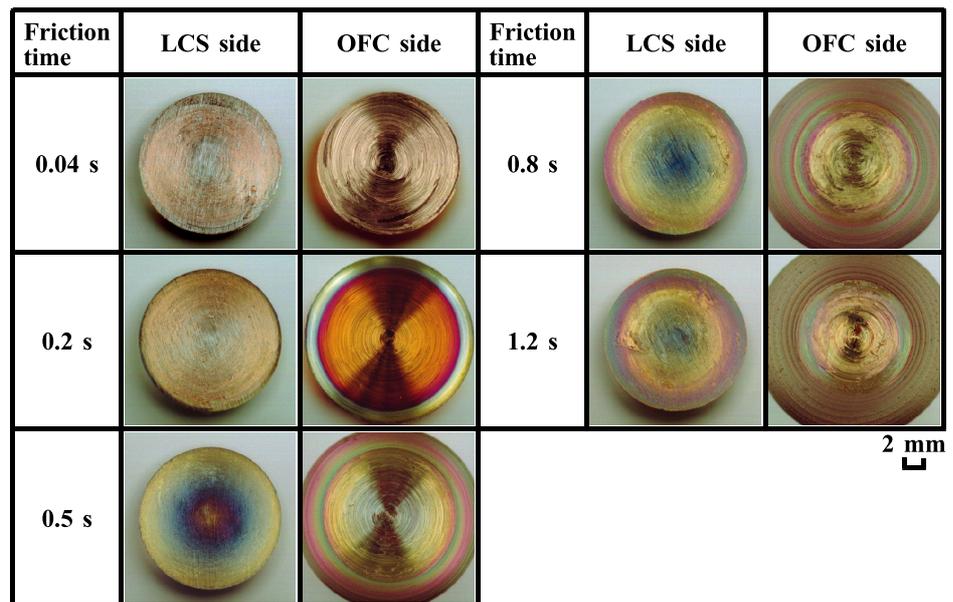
Appearances of weld interfaces after welding; friction pressure of 90 MPa.
